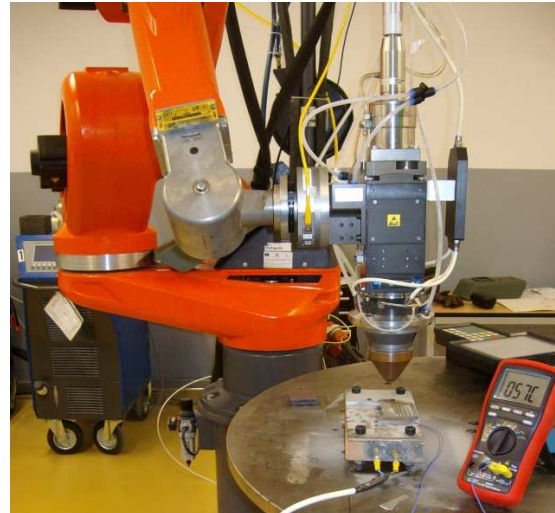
Experimental frame used to perform the experimental welding tests, at Transilvania University of Brasov
